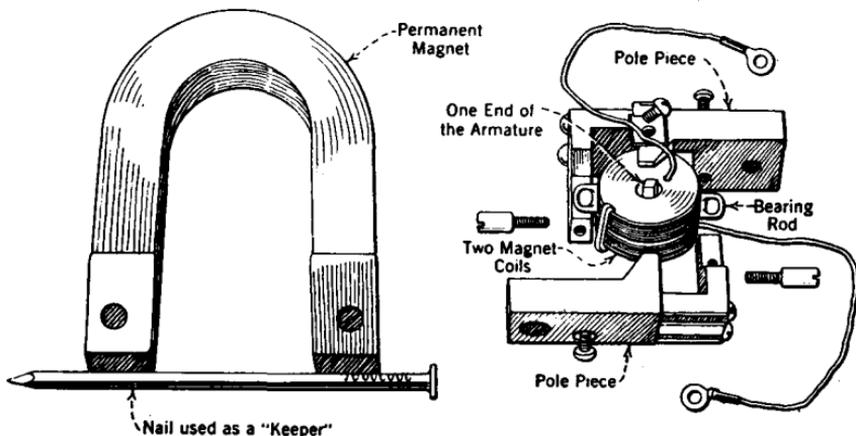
A partly exploded view of the motor mechanism of a cone-type loudspeaker.
